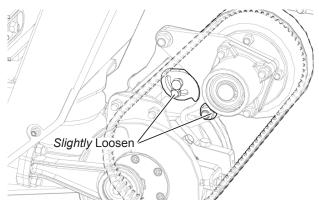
Knife Belt Tension - loosen lock nut and bolt
